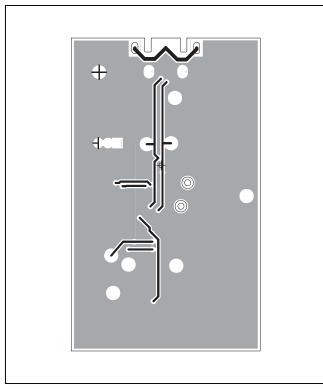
USBOSMB Mother Board PCB Layout—Solder Side
